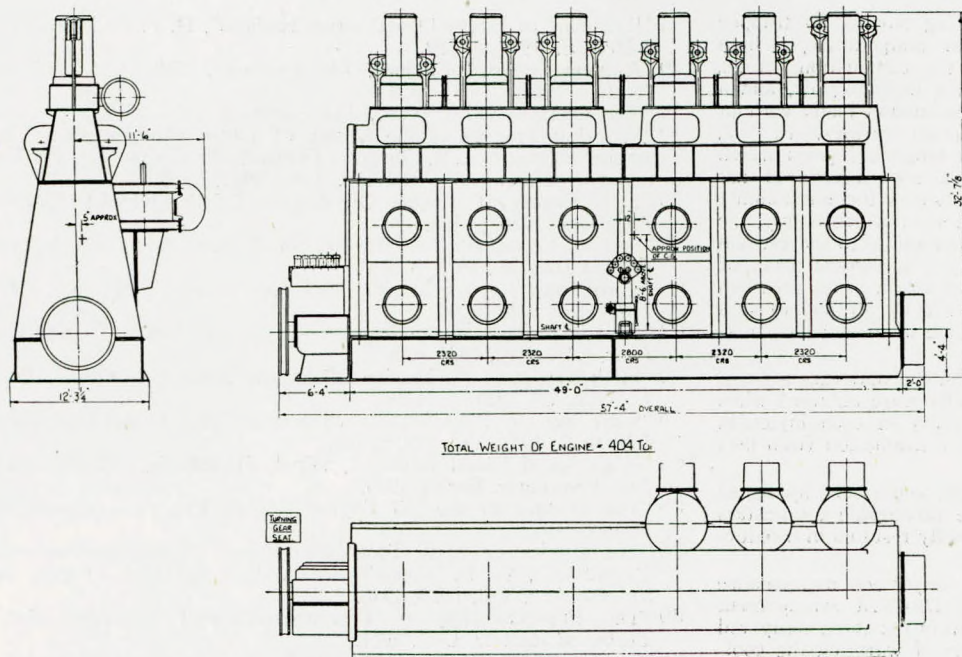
Six-cylinder Doxford opposed-piston oil engine with lever-driven scavenge pumps. Cylinder dimensions 670 mm. bore \times (1,340+980) mm. stroke; 6,800 b.h.p. at 116 r.p.m.
